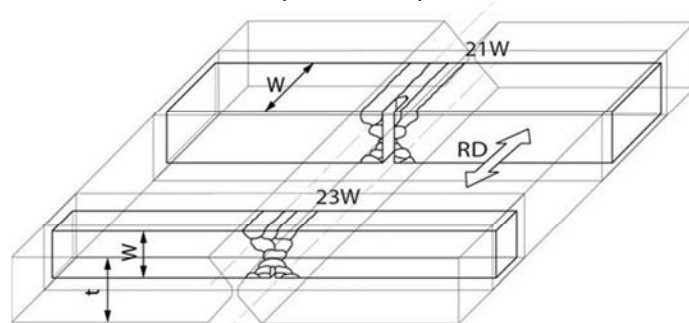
TPB specimen locations in the welded joint with the notch directions (RD = rolling directions)
